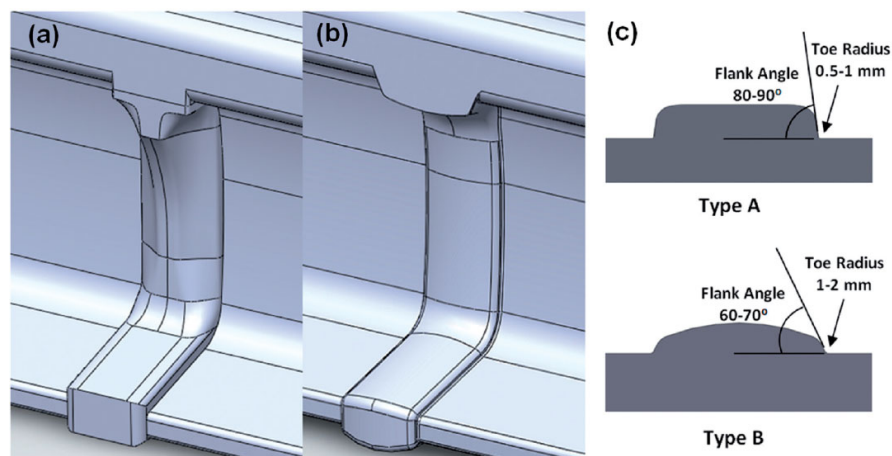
(a) Type A weld (b) Type B and (c) collar section from top of the rail foot [27]
